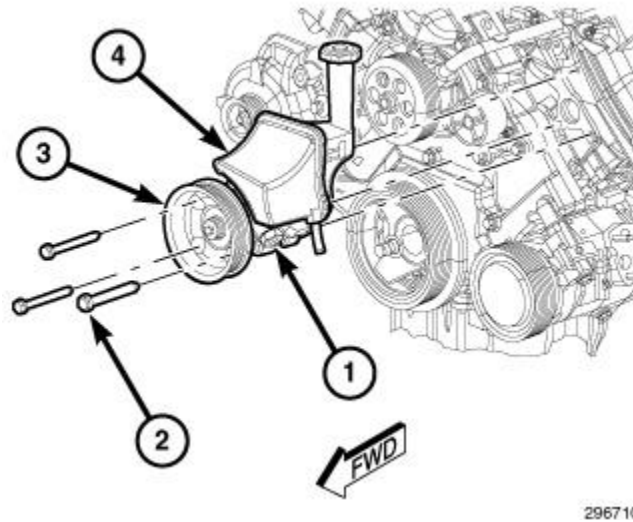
Power Steering Reservoir, Pump, Pulley & Bolts
